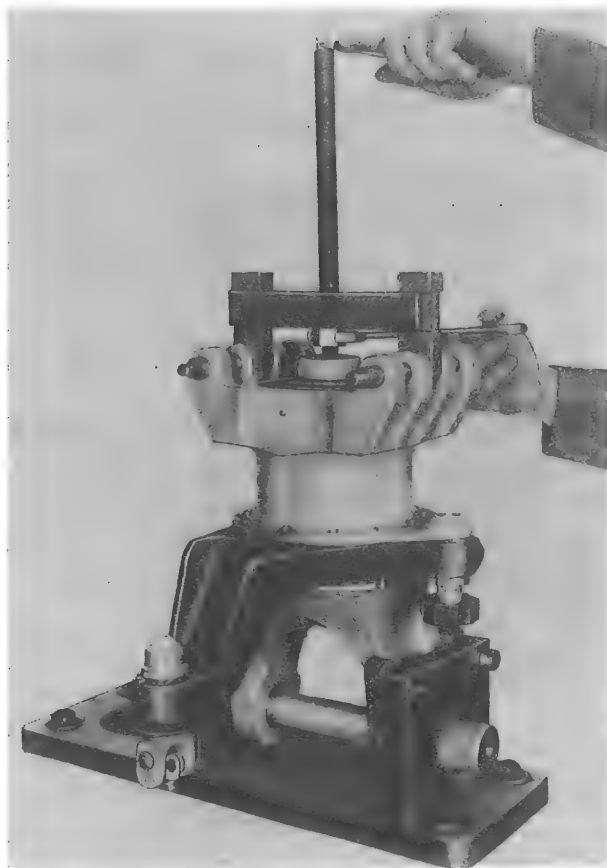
Pulling Sleeve and Bearing from Spindle
